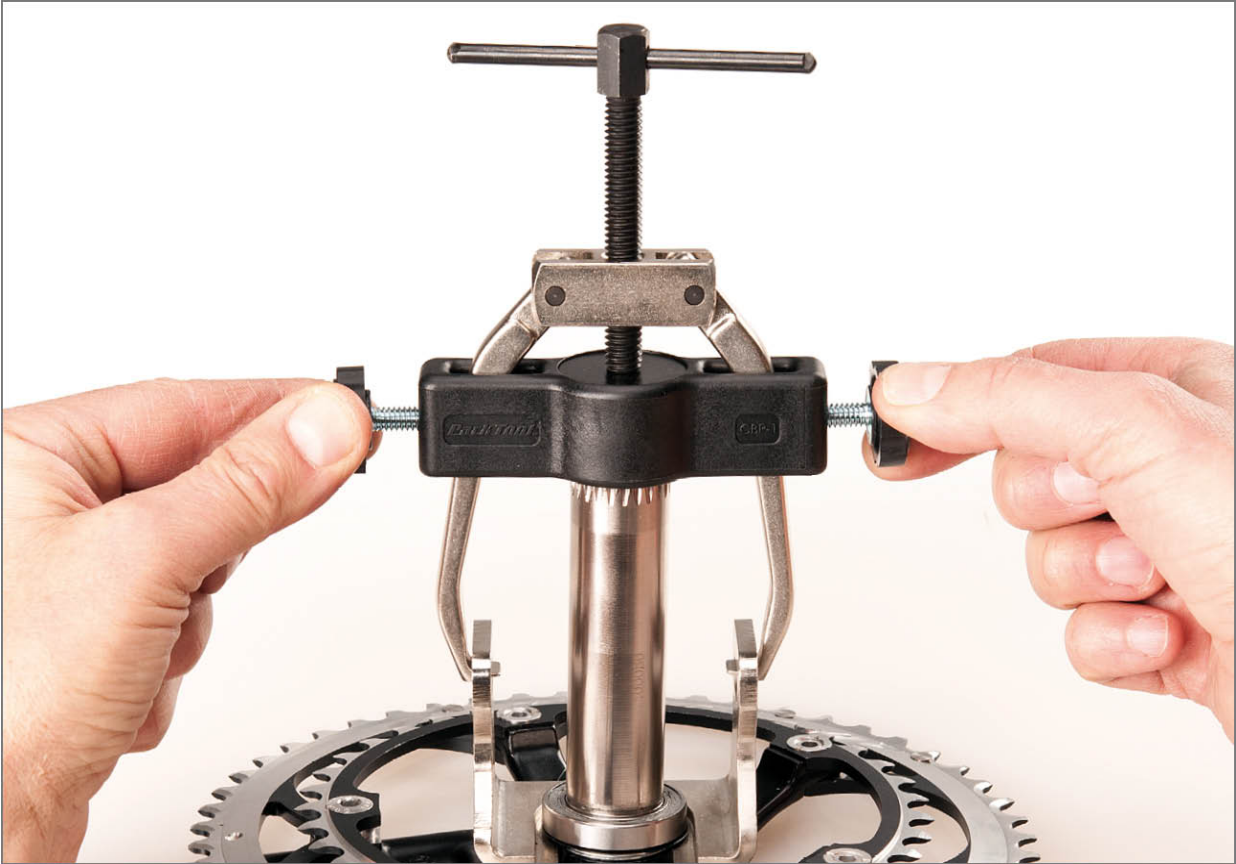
Engage caliper fingers over bearing and tighten knobs
